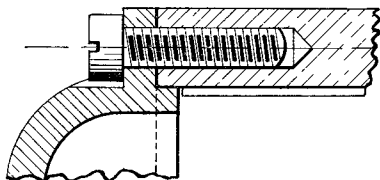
SHOWING ALTERNATIVE METHOD OF SECURING END COVERS
